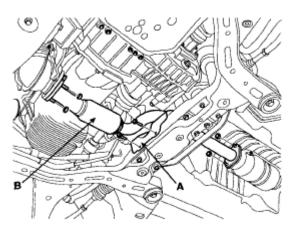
Identifying Steering U-Joint Mounting Bolt Courtesy of HYUNDAI MOTOR CO.
